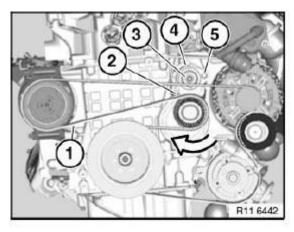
Identifying Belt Tensioner With Screws Courtesy of BMW OF NORTH AMERICA, INC.
